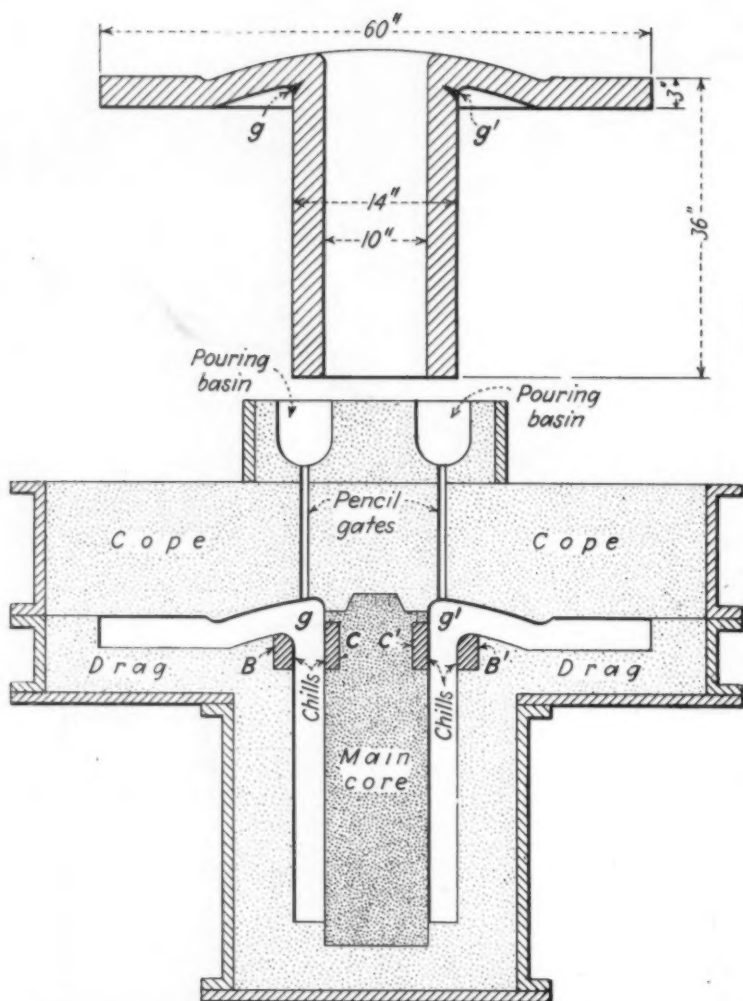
Shrink holes that occurred at the flange joint on this 60-in. cylinder head were overcome by placing chills in the mold, as the lower drawing shows.
